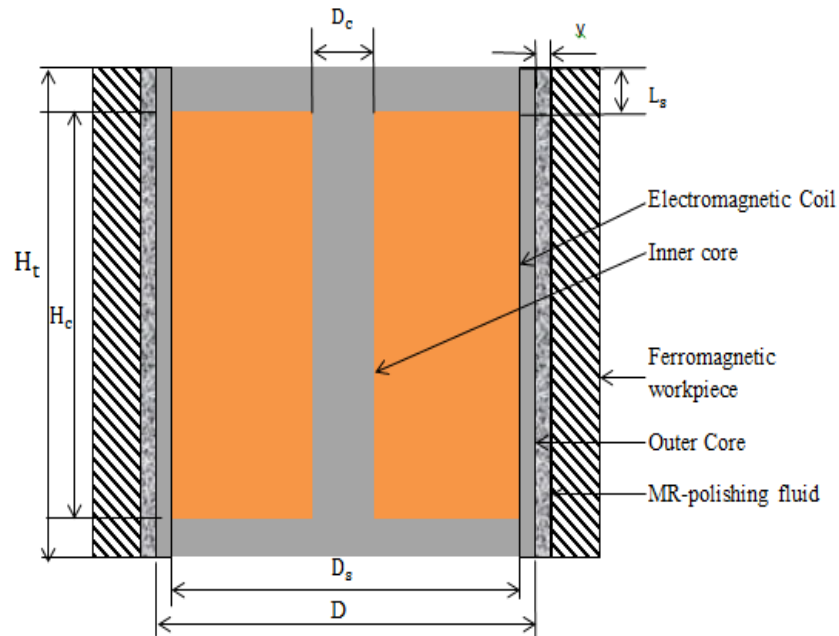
Schematic diagram of MRH tool with ferromagnetic workpiece
